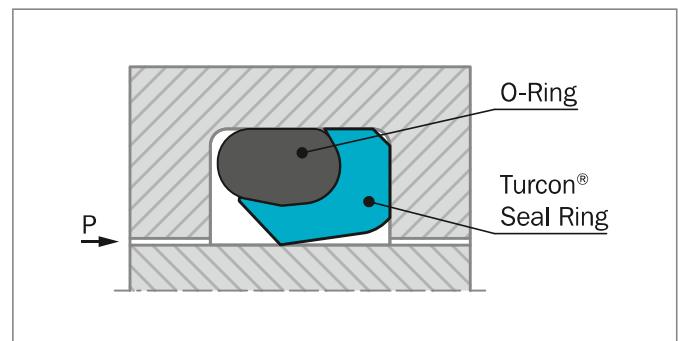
Turcon® VL Seal® mounted in O-Ring groove
